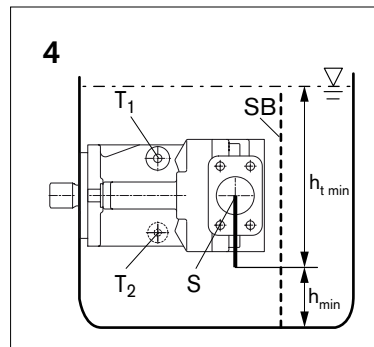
Inside-reservoir installation for size 16 to 40 with installation position 4
